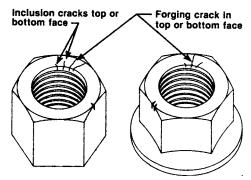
Typical Forging and Inclusion Cracks in Nuts
